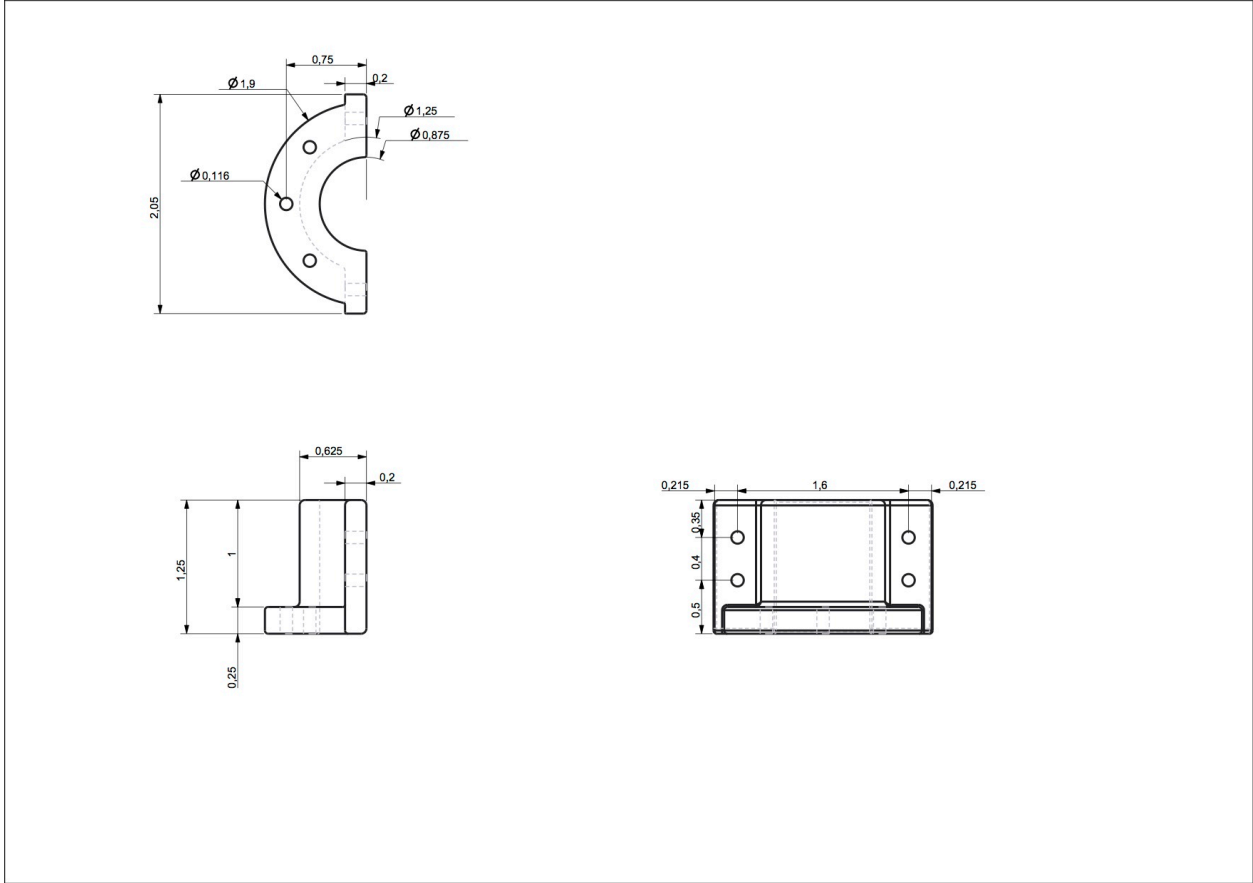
Item 26 – Compression spring delrin tube holder (Inches)
